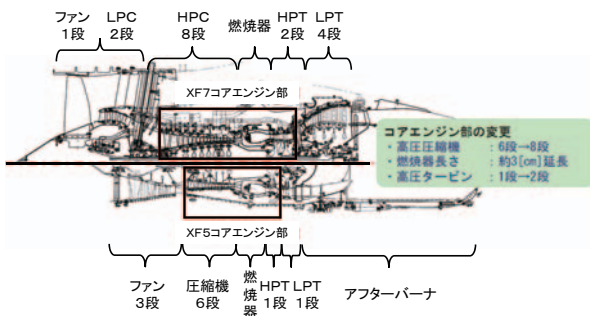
Family type of core engine parts (XF7-1 & XF5-1)
